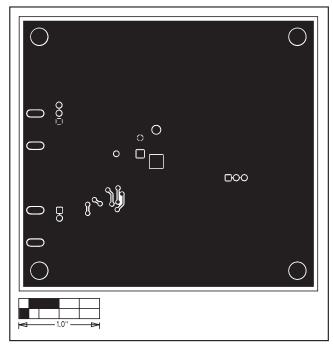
MAX8622 EV Kit PC Board Layout—Solder Side
